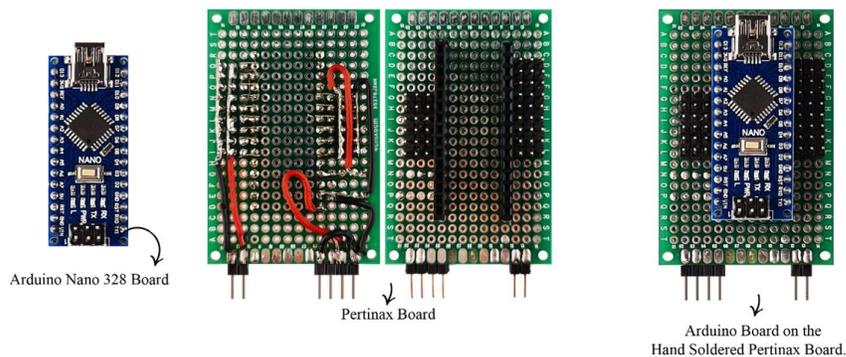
Arduino Nano 328 Board and Hand Soldered Pertinax Board.
